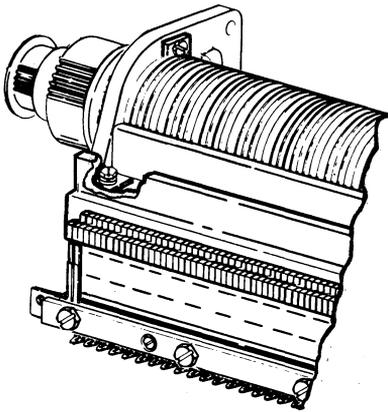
400001 Print Head Assembly (Friction and Tractor Feed – 80-Column) (Early Design)
